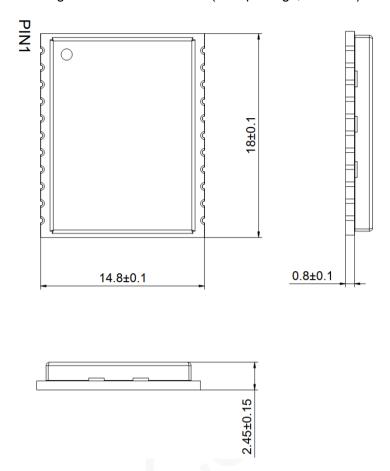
N21 dimensions (LCC package, unit: mm)
